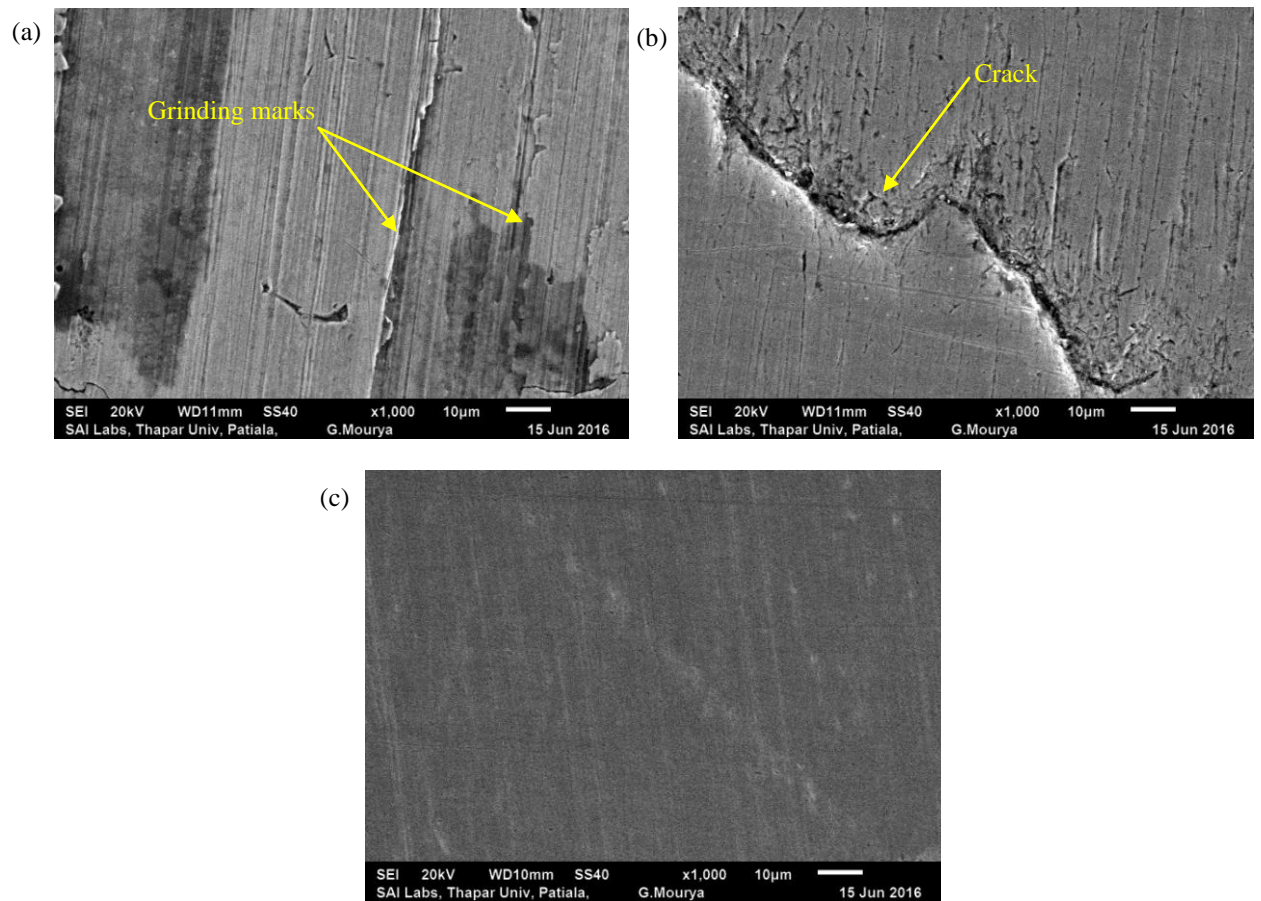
SEM images of the workpiece at 1000x magnification (a) after grinding with sub surface damage (b) workpiece surface with cracks due to traditional finishing process and (c) workpiece surface after finishing for 40 minutes with optimized parameters
